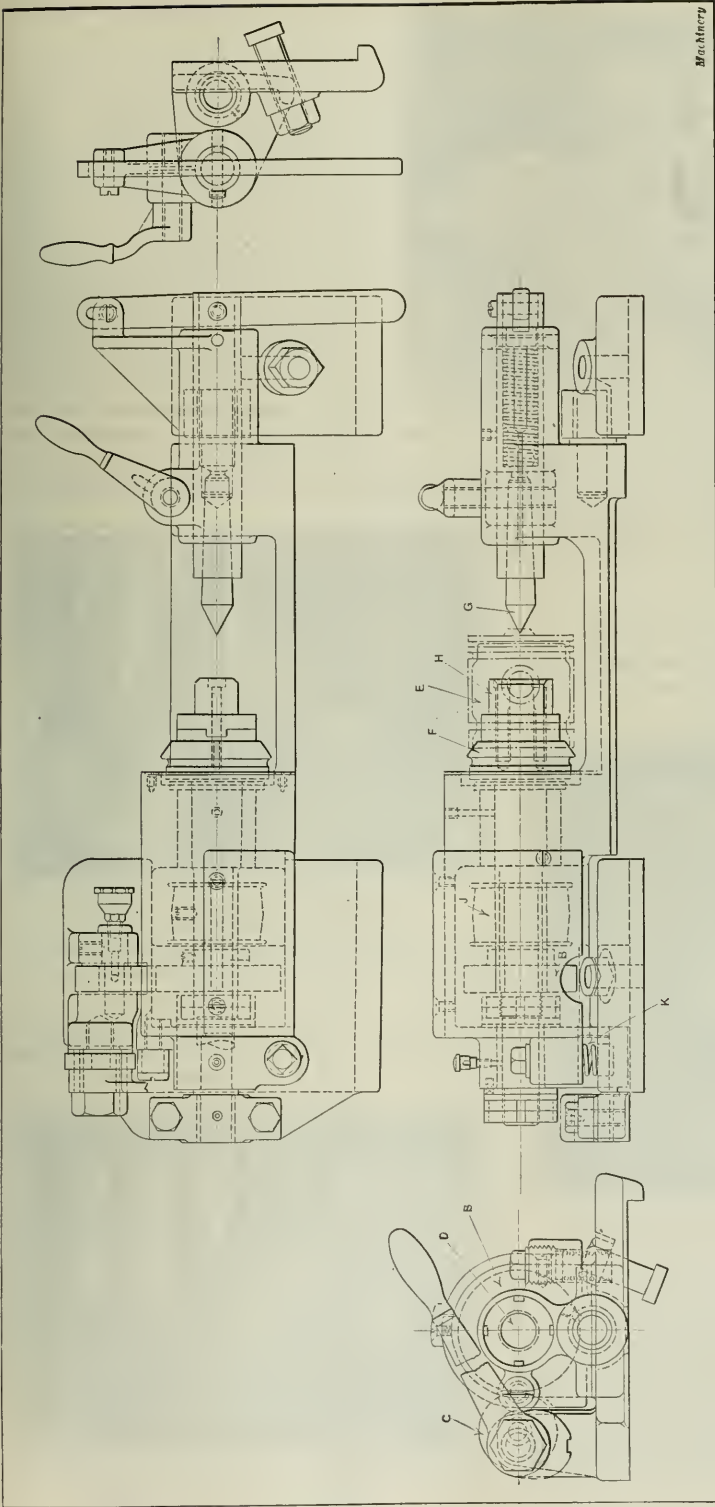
Details of Design of the Grinding Machine Attachment shown in Operation in Fig. 10
